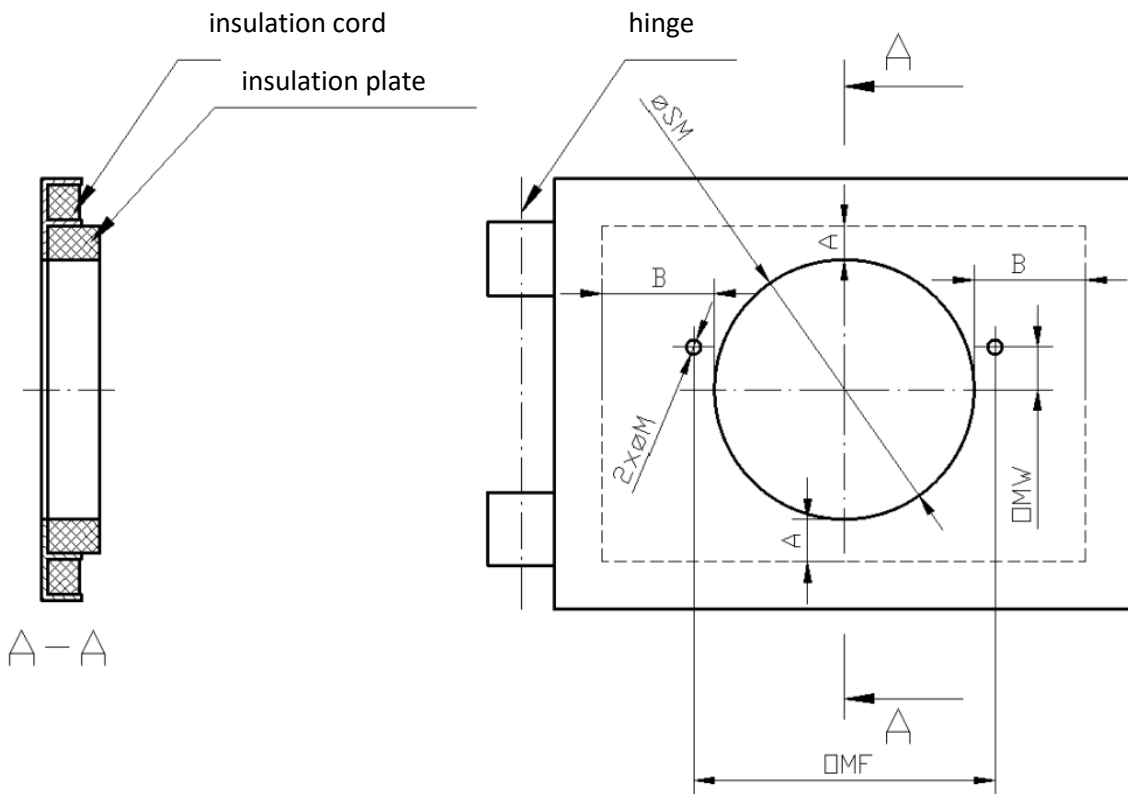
Diagram for the location of the mounting holes for burners with insulating jackets and a mounting plate burner types: 4-16 kW, 5-20 kW, 6-26 kW, 8-36 kW.
